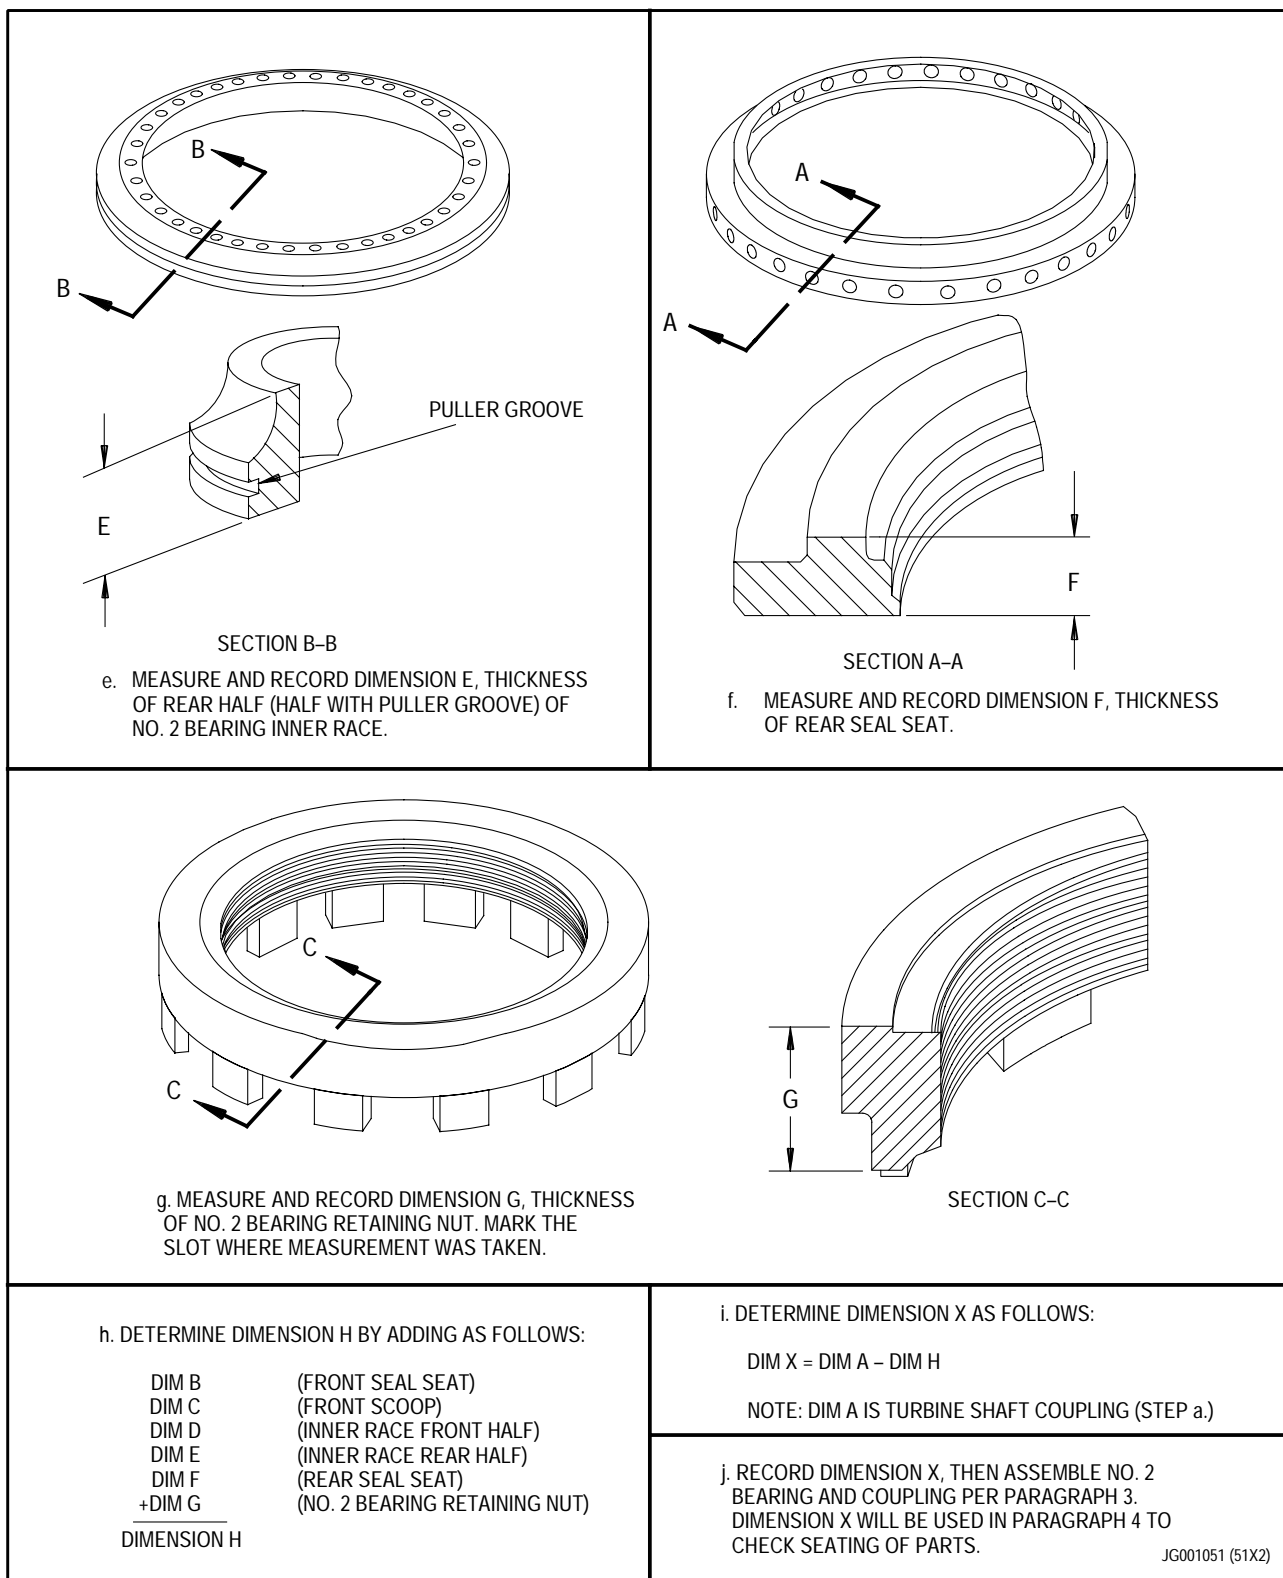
No. 2 Bearing and Coupling - Measuring Individual Parts (Sheet 2 of 2)
